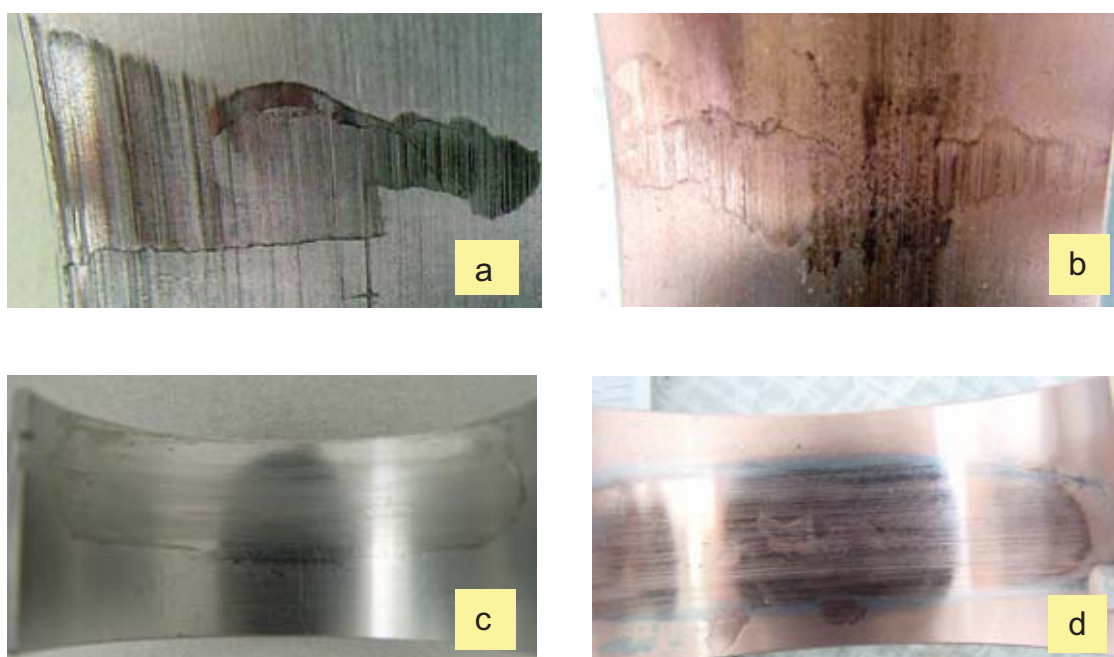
Typical damage of the bearing tested in the: (a, c) rigid housing, (b, d) elastic housing
